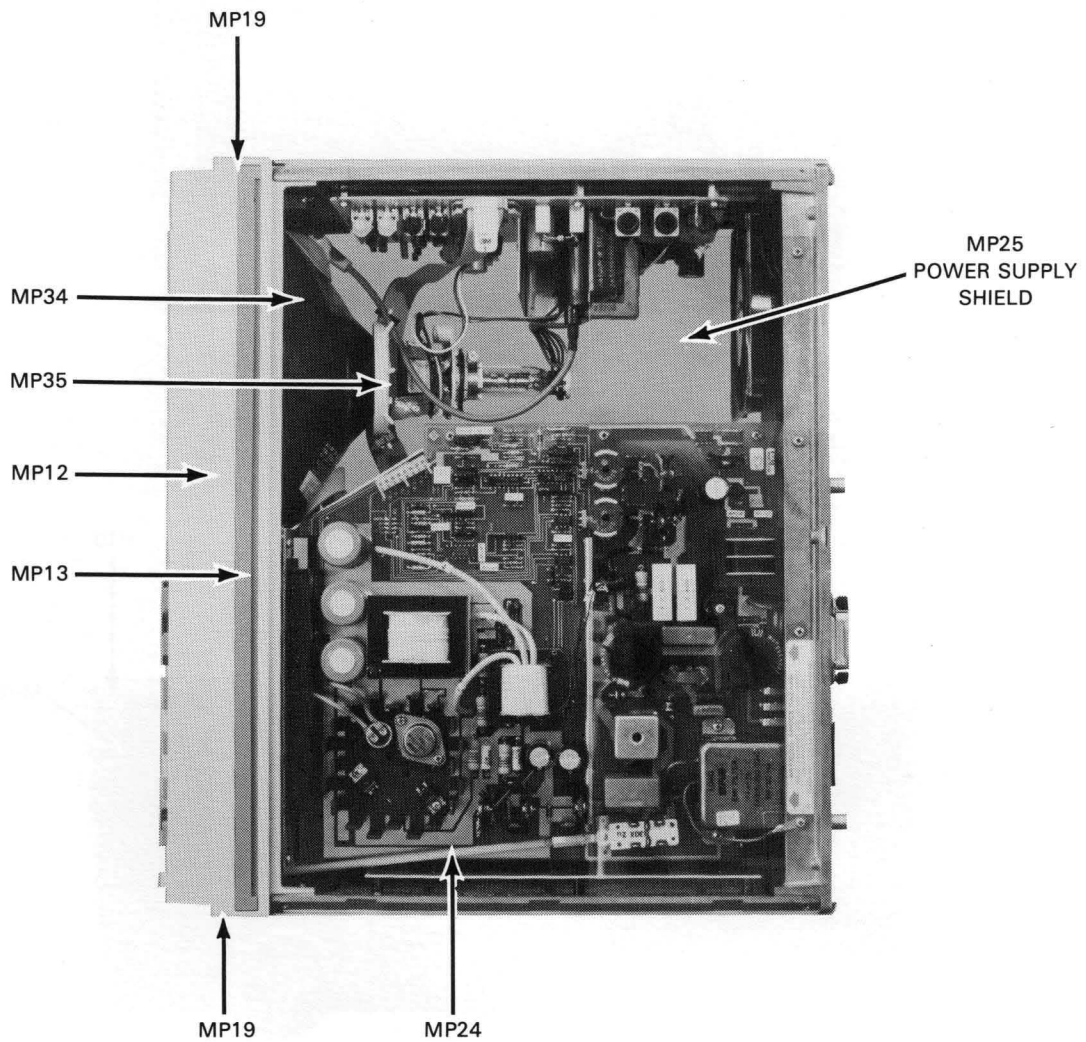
Mainframe Mechanical Parts Locations (sheet 3 of 4)
